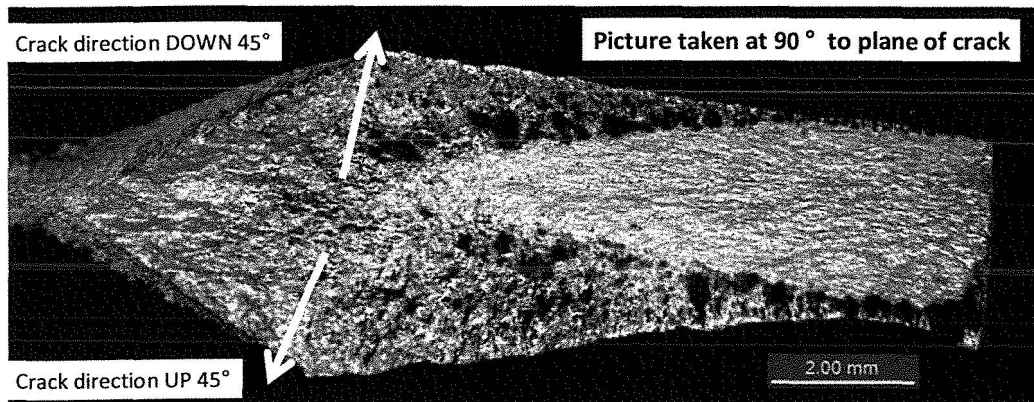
vertical photo of the crack plane for the 3.2 mm samples
